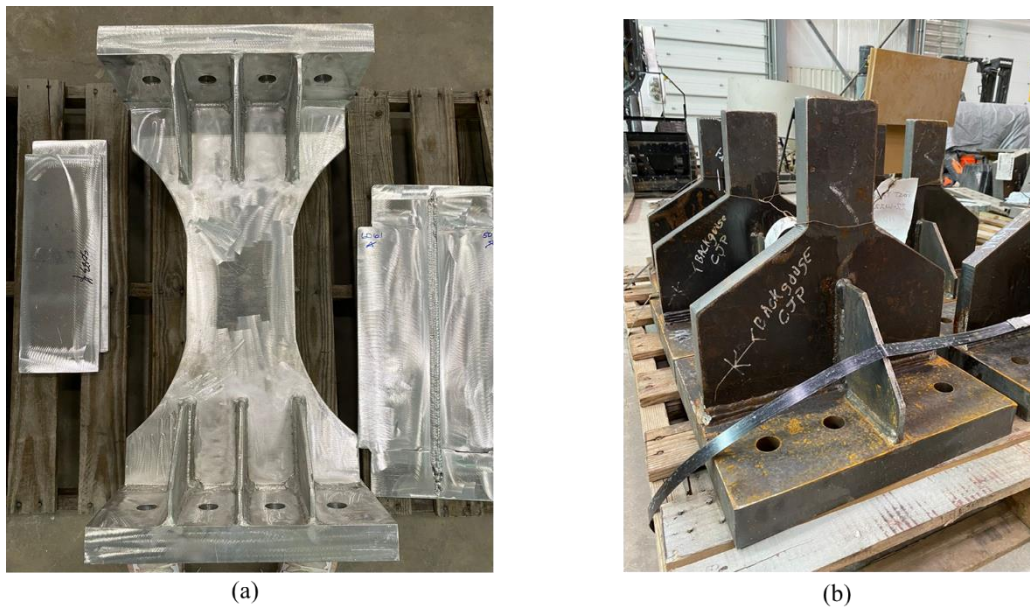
Components of the initial aluminum specimen (a) The initial aluminum specimen along with the BM and HAZ plates (b) The steel grip assembly.
